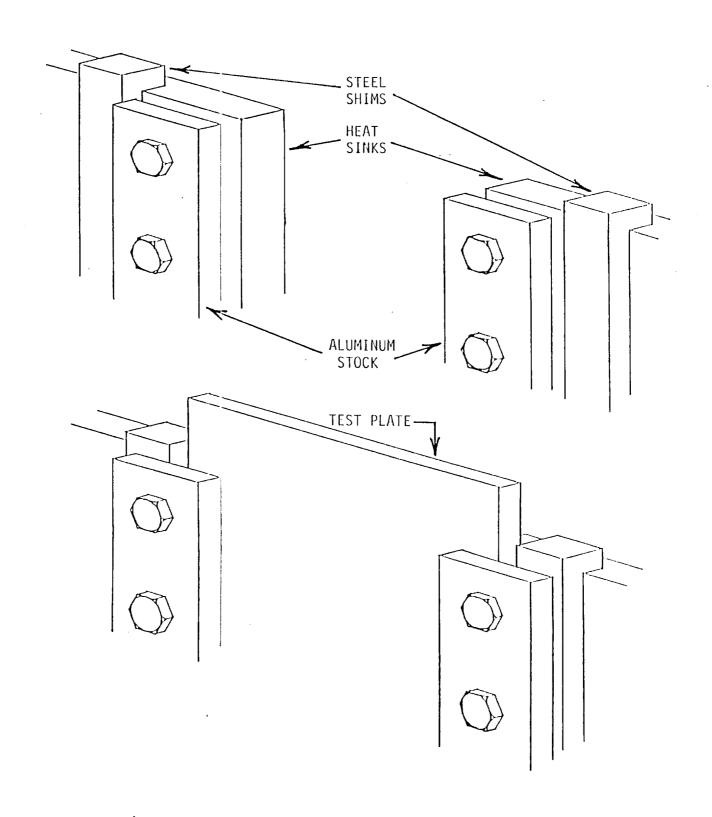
Expanded drawing of test sheet clamping arrangement. Unassembled (above) and assembled (below).
